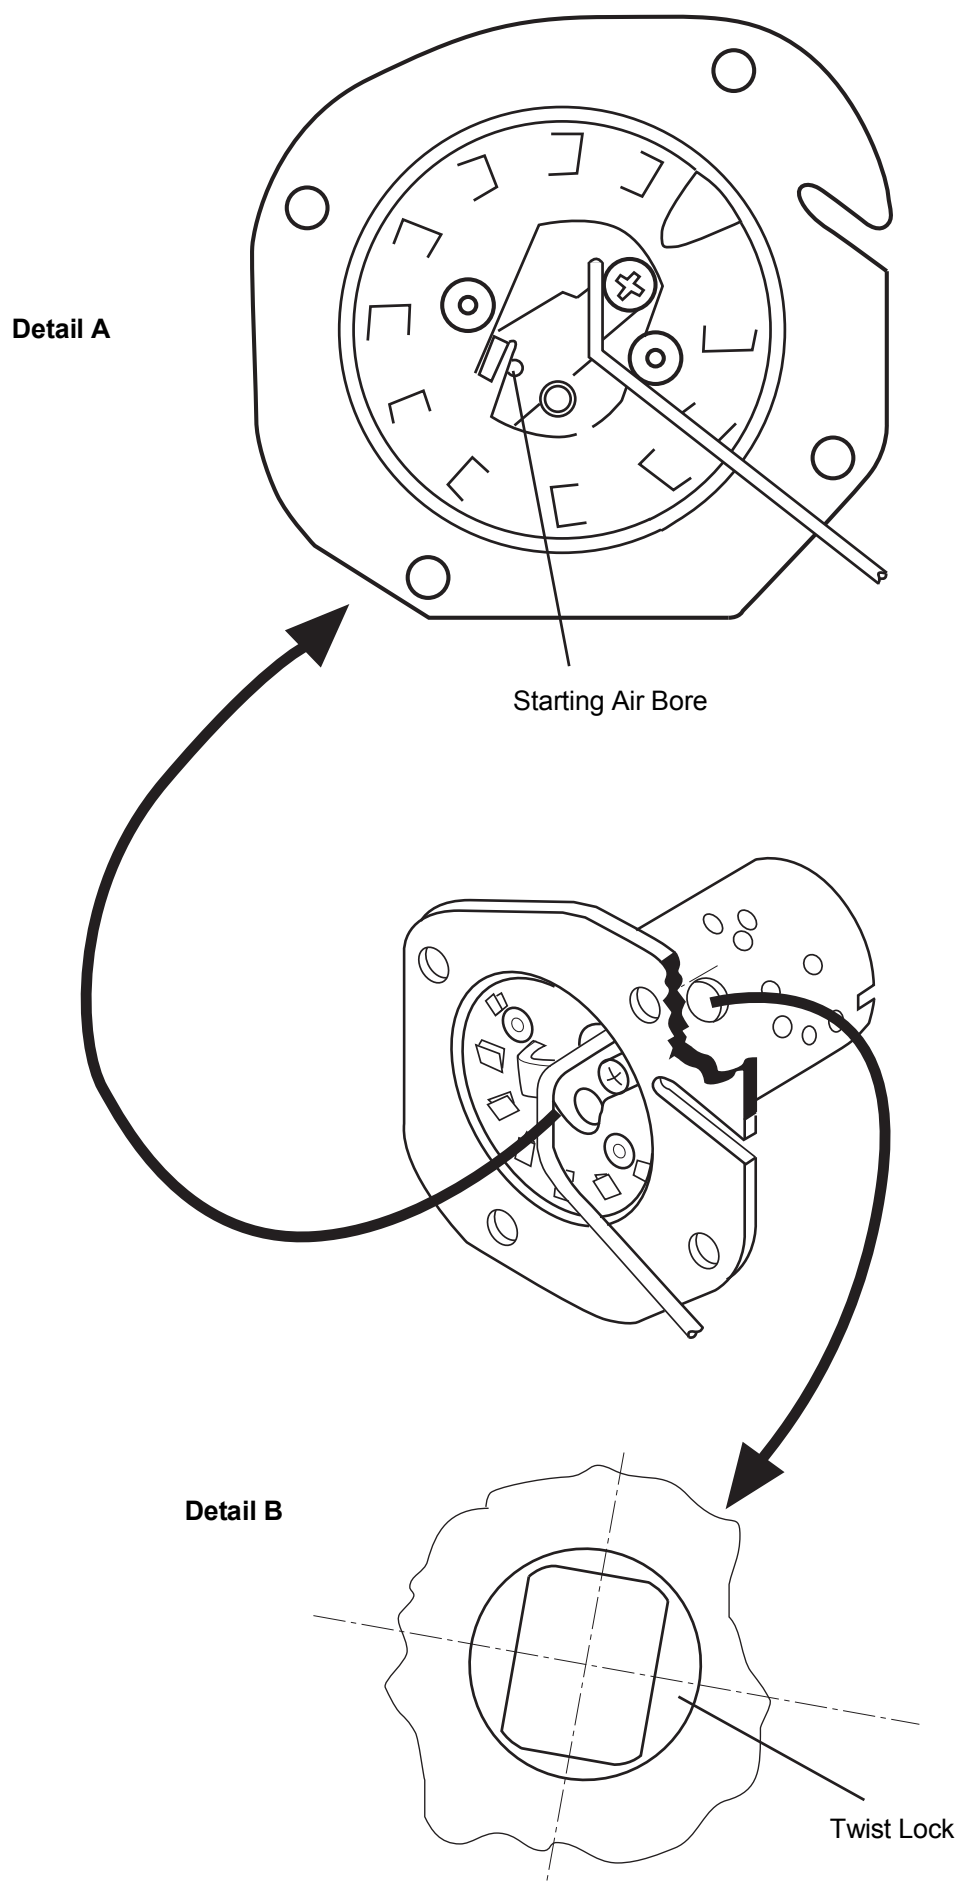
Disassembly of Heat Exchanger (Sheet 2 of 2)
